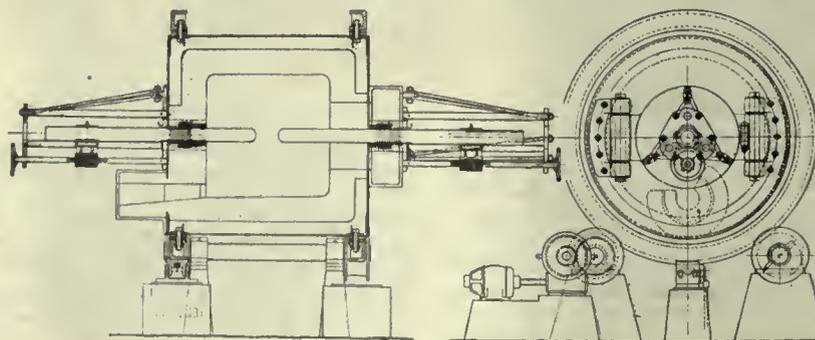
CROSS SECTION AND END ELEVATION OF FURNACE.
